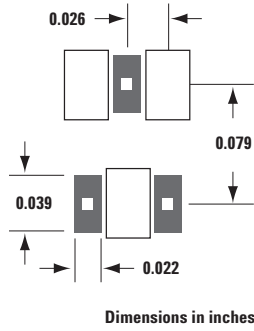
Recommended PCB Pad Layout for Avago's SC70 3L/SOT-323 Products.
